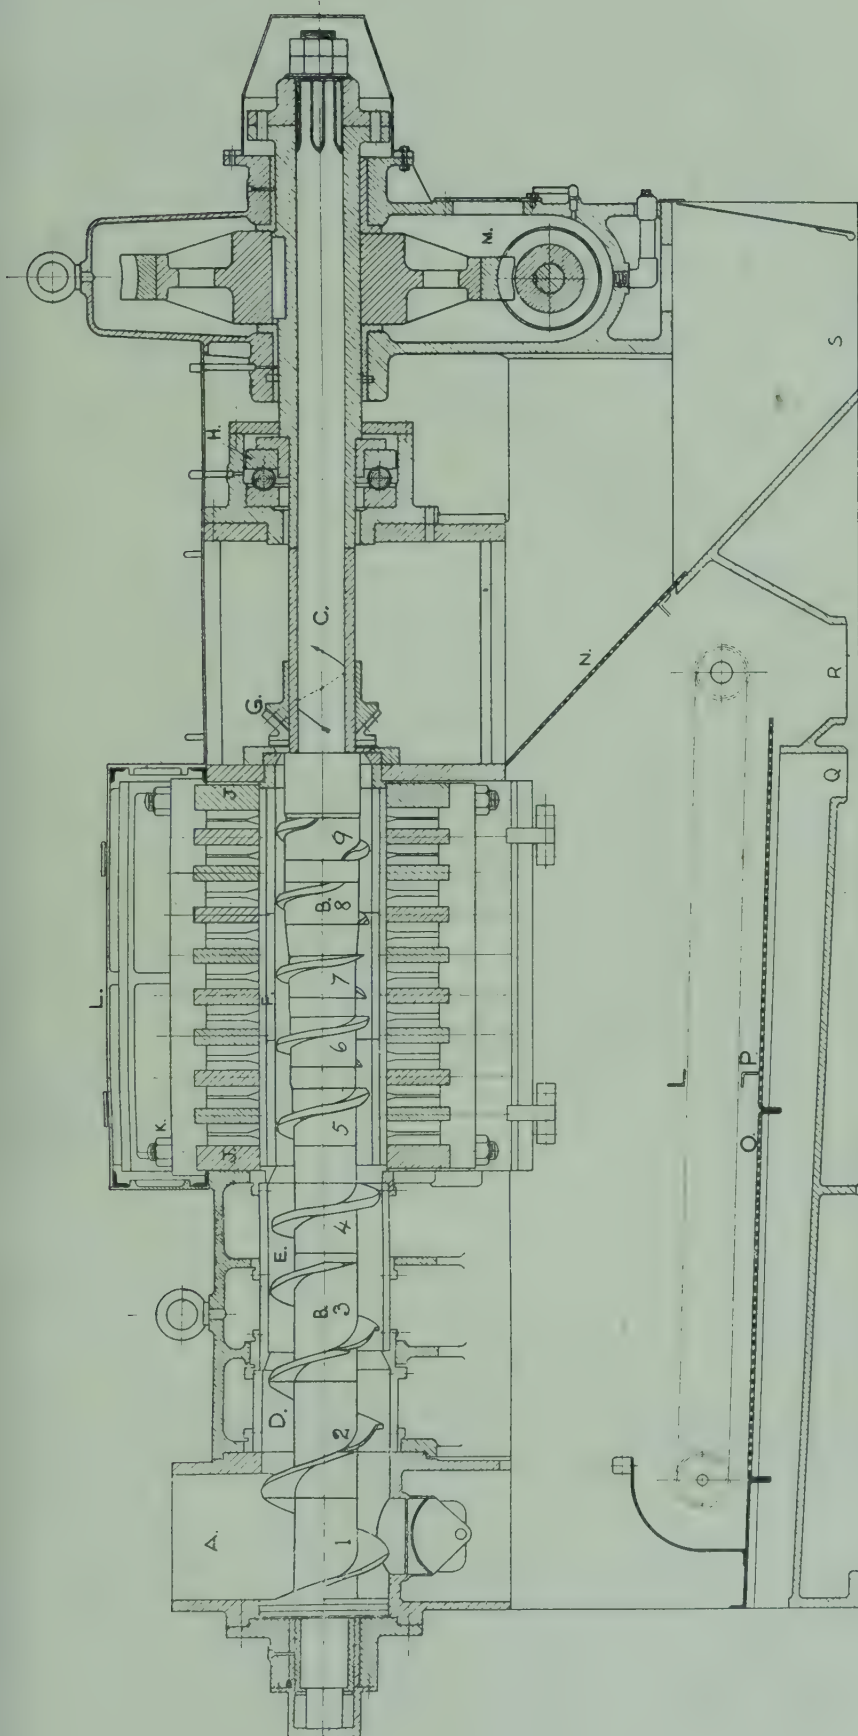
SECTIONAL VIEW OF L.P. EXPELLER
